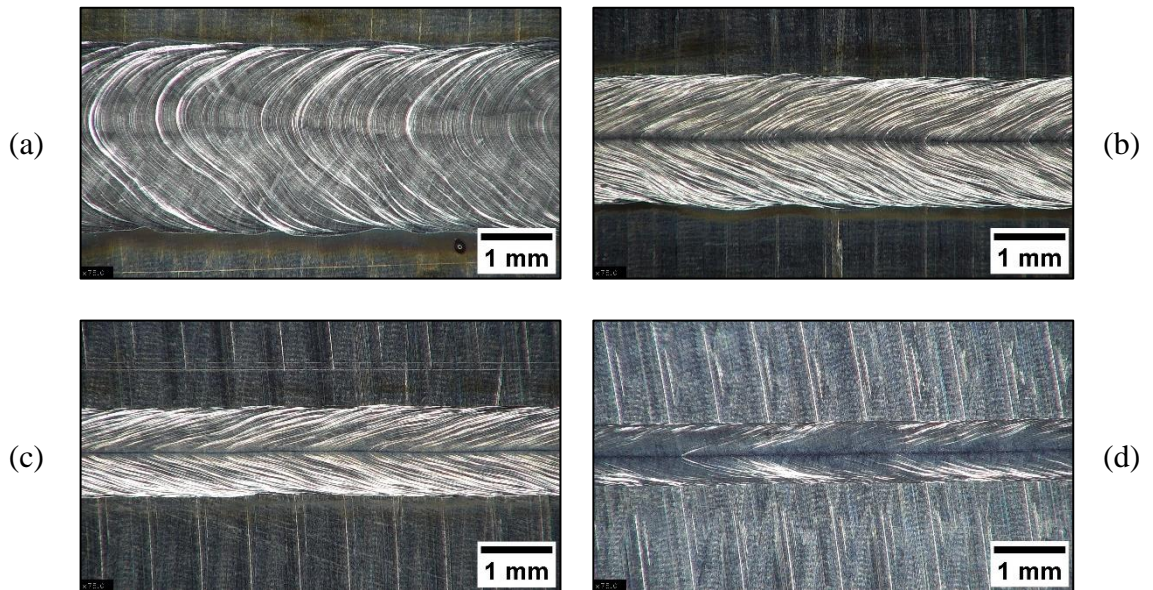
Figure D.6 show photographs of the weld surfaces at respective powers of 800W, 1000 W, 1200 W, 1600 W, 2000 W, and 2400 W for 304L. Four travel speeds at each power are represented. Figure D.7-Figure D.12 show photographs of the weld ends that were used to approximate the weld pool geometries. These were produced by maintaining the beam travel velocity and instantly extinguishing the laser beam.
